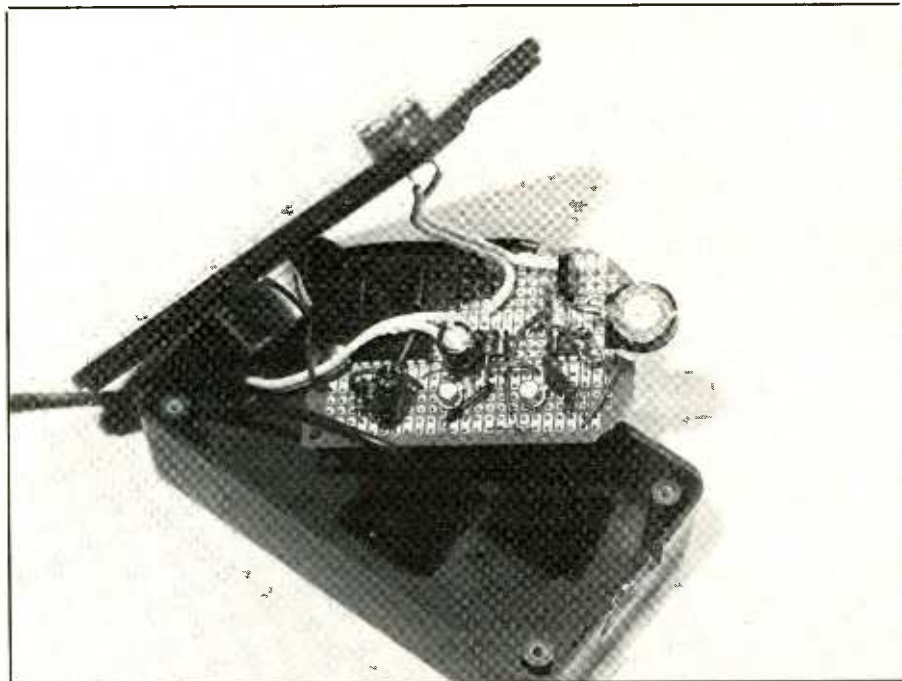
An alternative way to build the project, with the photocell mounted on the front panel of the enclosure. No holes are drilled through the floor of the enclosure for access to the adjustment slots of the trimmer controls.
